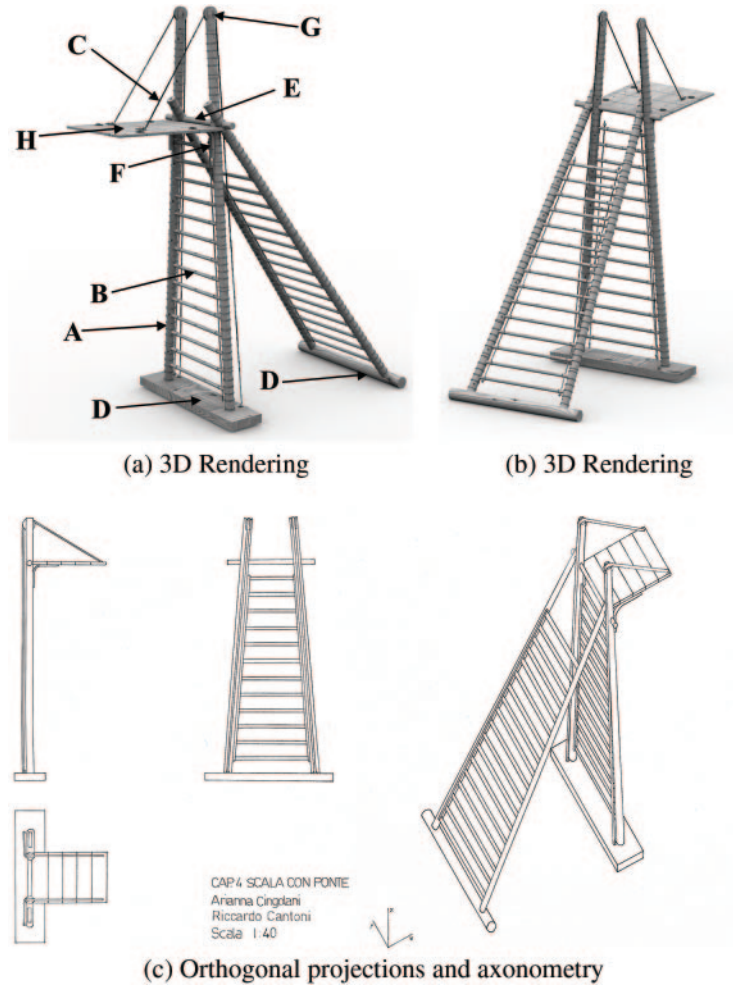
3D Rendering and drawings of the ladder tower with bridge.
